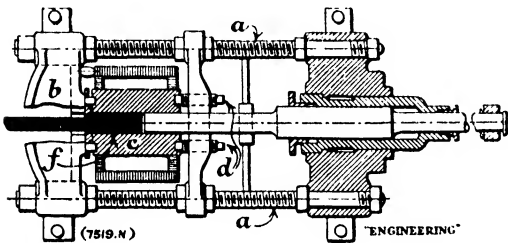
Horizontal extrusion press designed by Alexander Dick in 1894.
